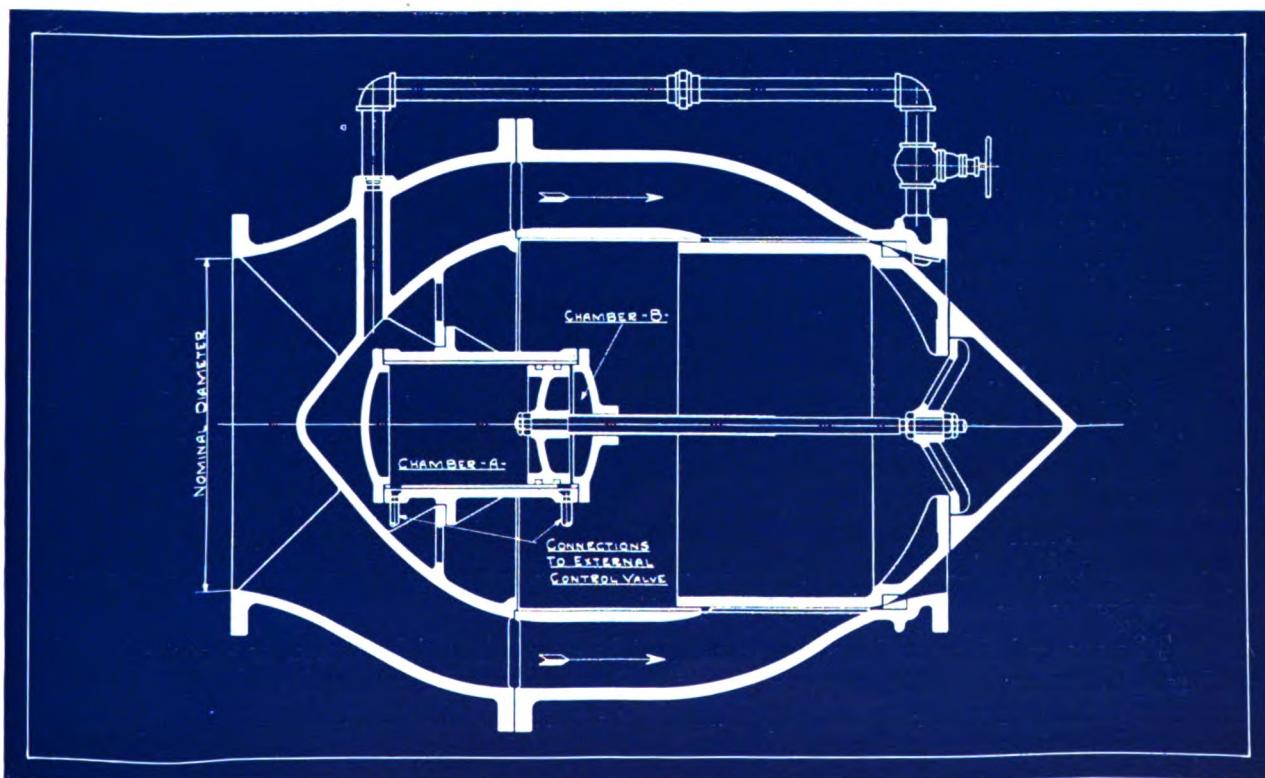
STANDARD CAST-BODY VALVE, VALVE CLOSED
